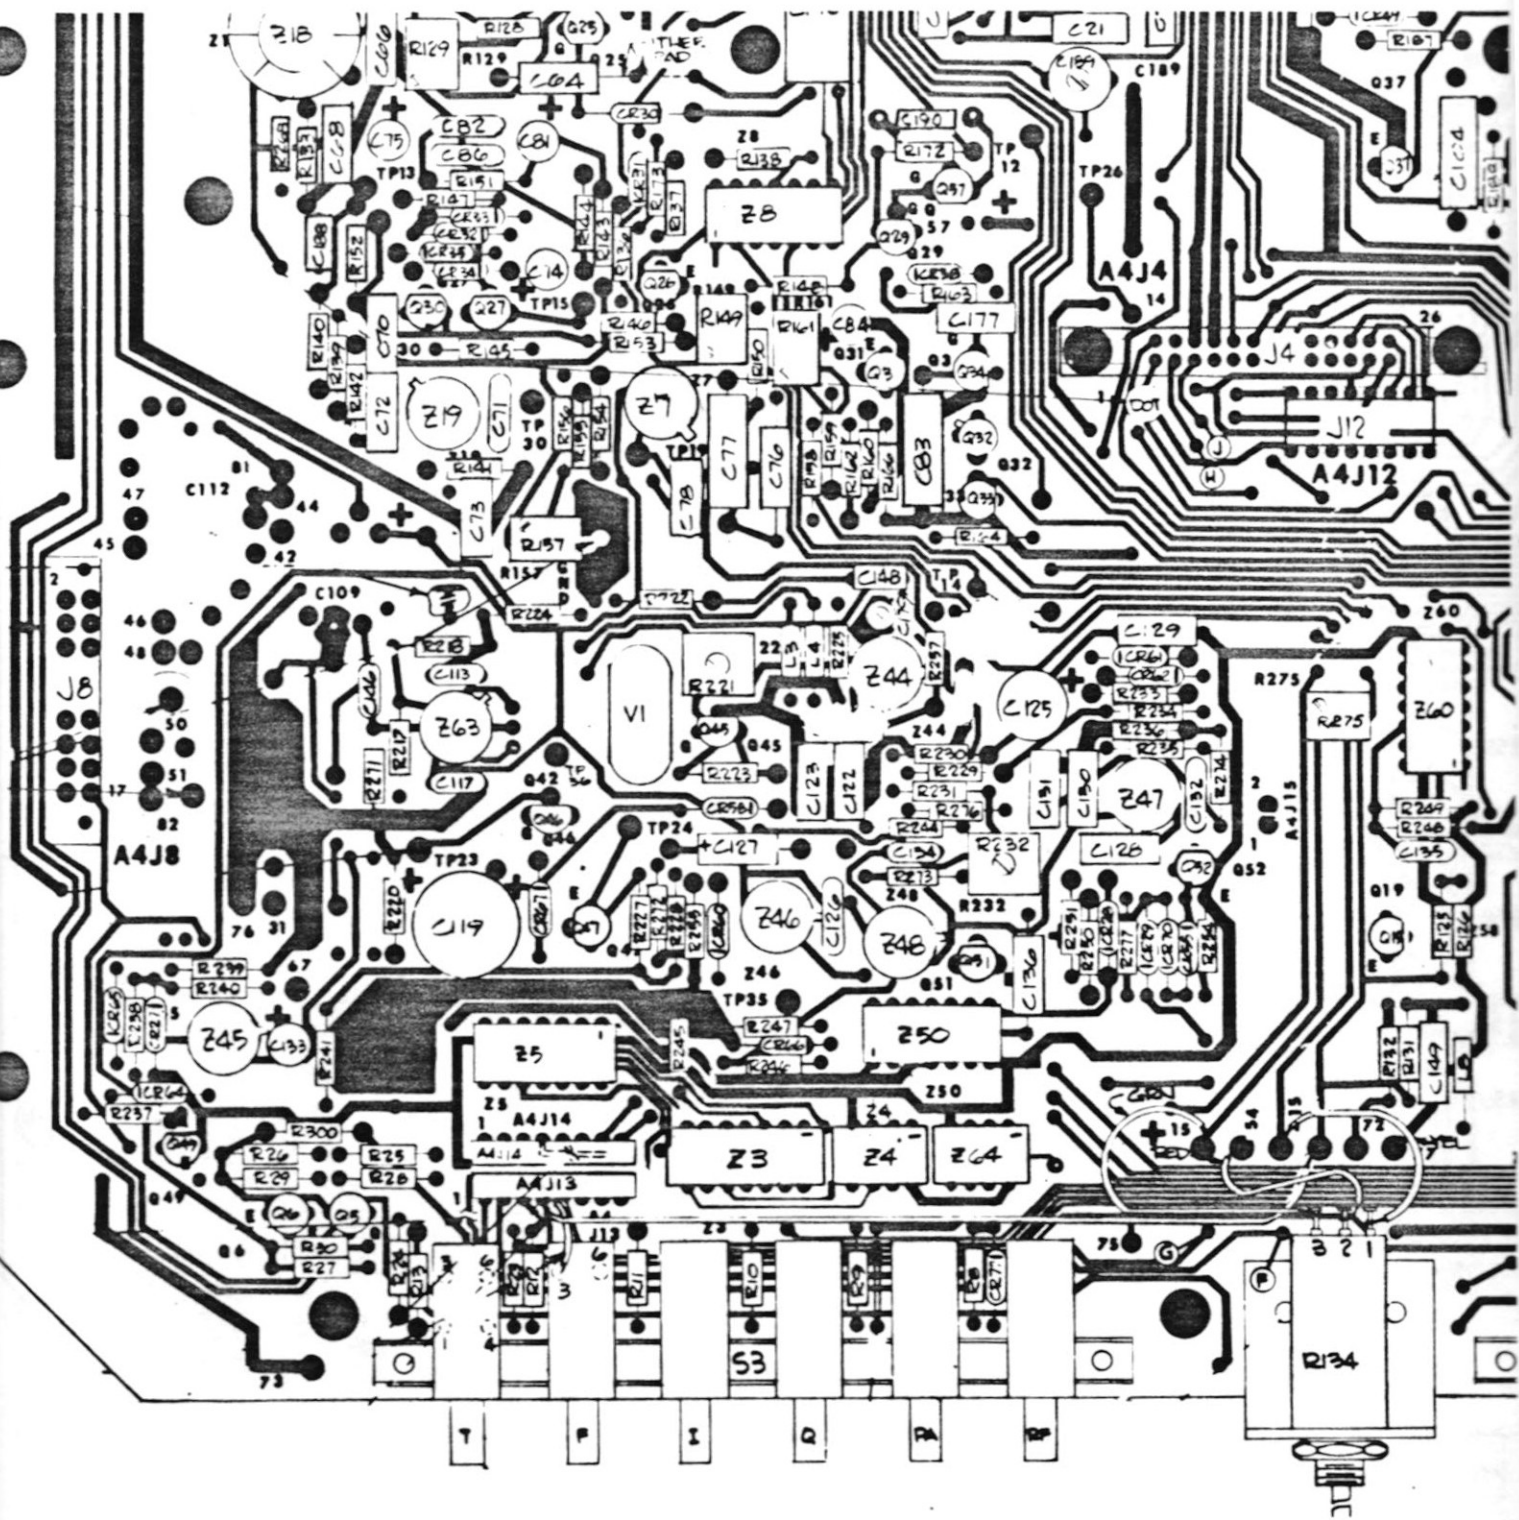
Main Board, Parts Locator (Sheet 3 of 4)
